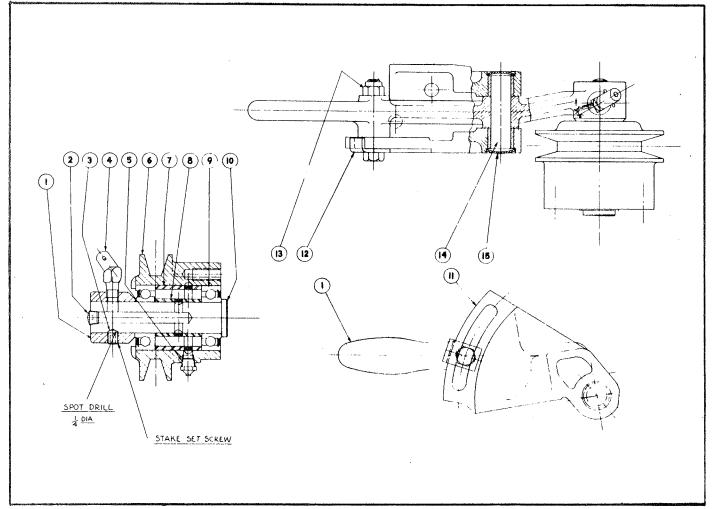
A—FAN SUPPORT ASSEMBLY PARTS FOR MODEL "B-1" AND "D-1" UNITS
